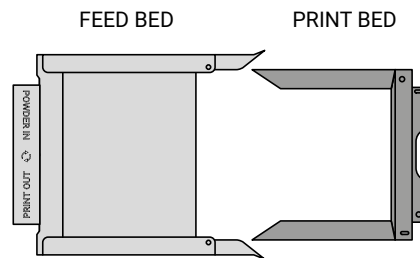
The proper arrangement of the IO BOX, allowing the user to remove the finished printout.
